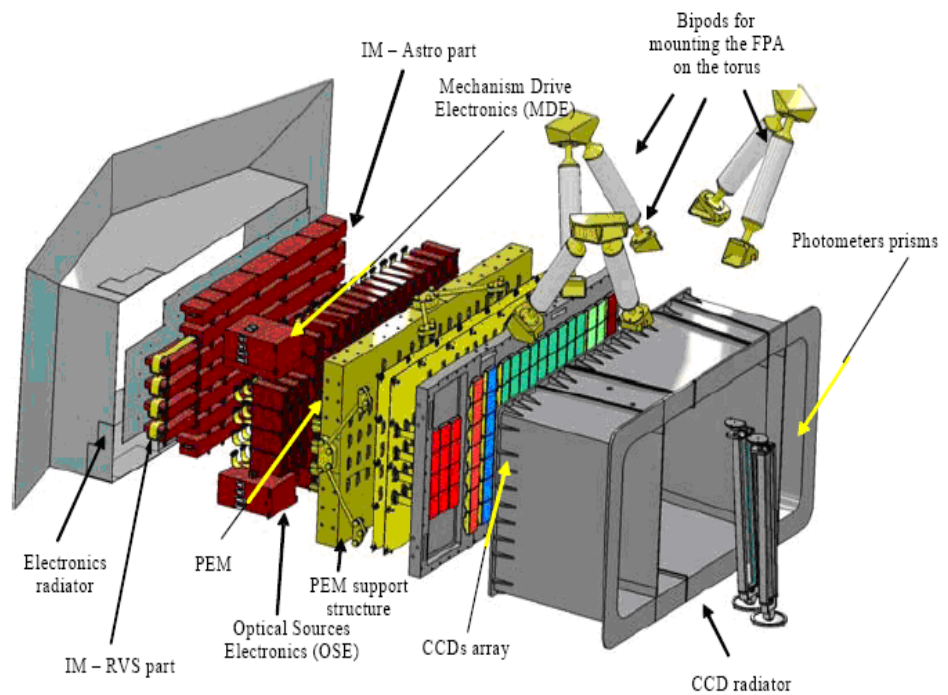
The IM module is part of the optical focal plane platform assembly. The three dimensional colour images are reproduced by kind permission of EADS-Astrium, Toulouse, France.
